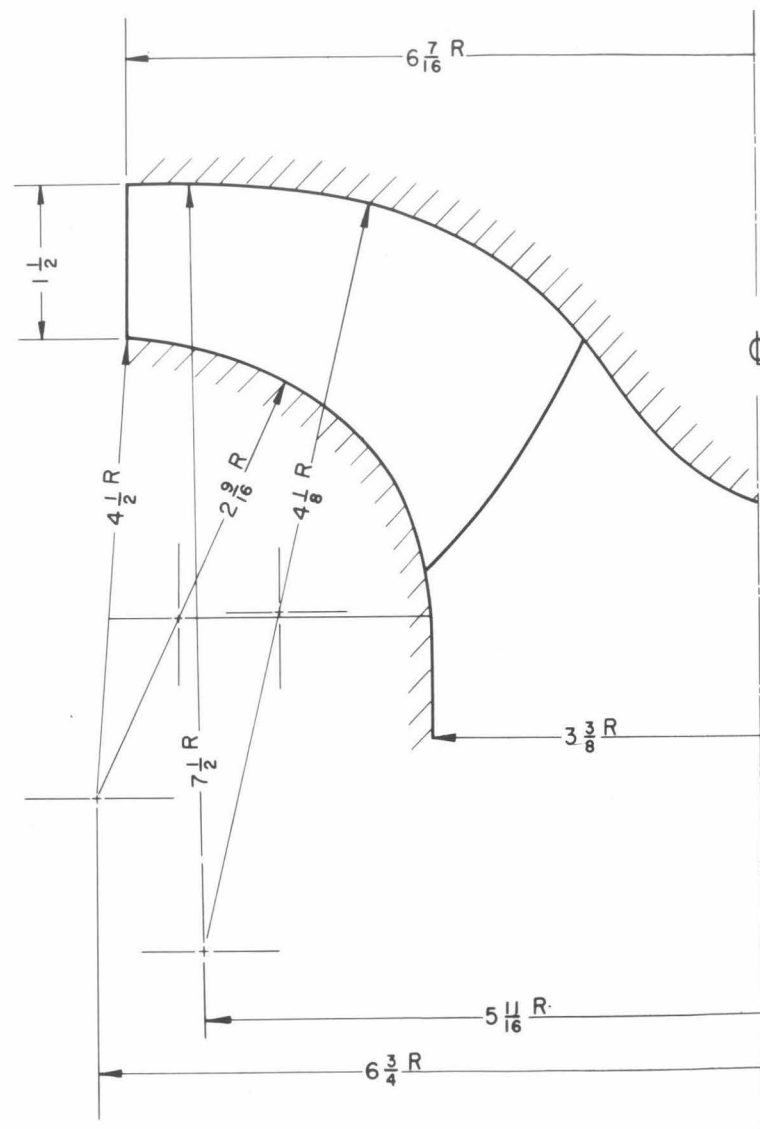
Cross-section sketch of the three-dimensional impeller.
